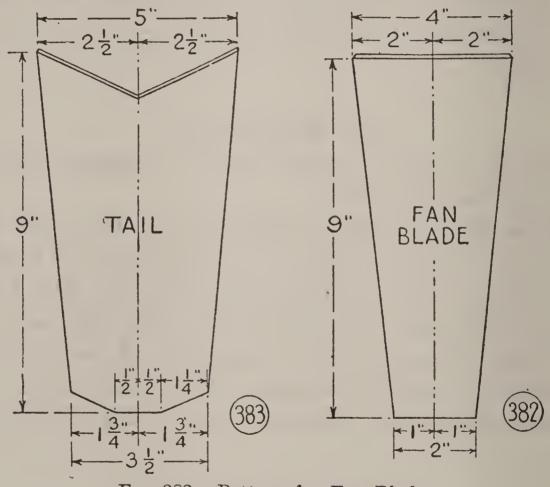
Pattern for Fan Blades. Fig. 383.—Pattern for Tail.
